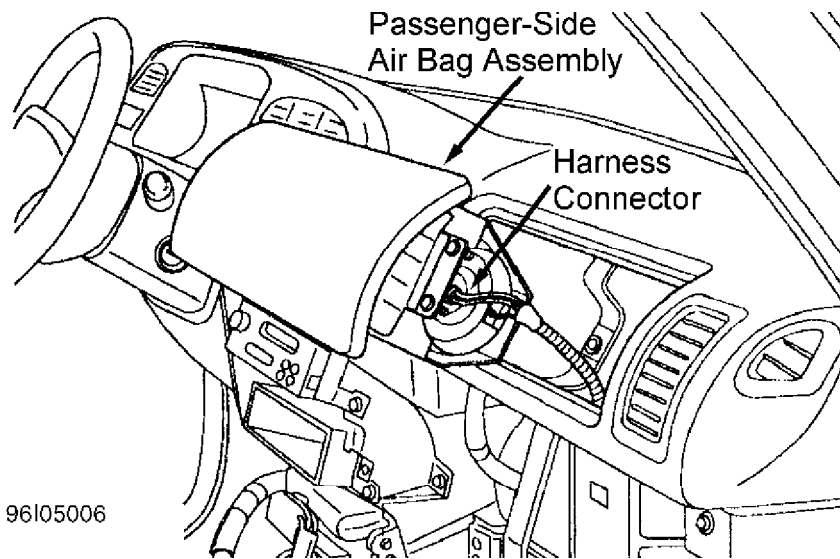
Removing/Installing Passenger-Side Air Bag Assembly
